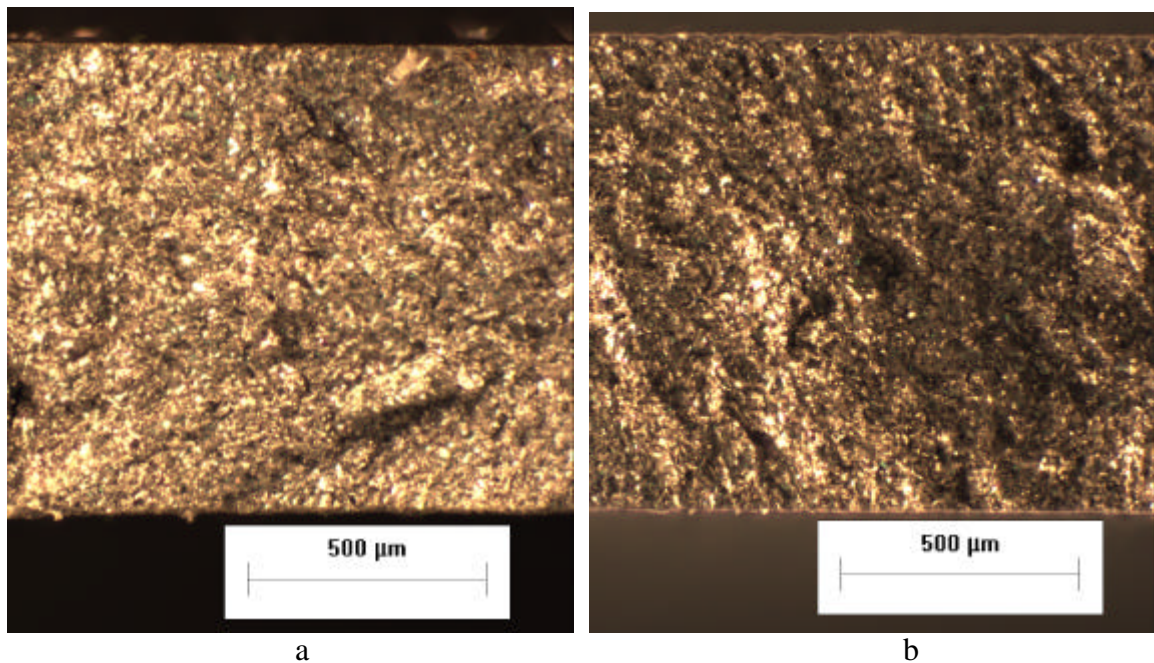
Cross-sectional fracture surfaces of material tested at room temperature in conditions: a) unexposed and b) exposed to 800°C for 5 hours
